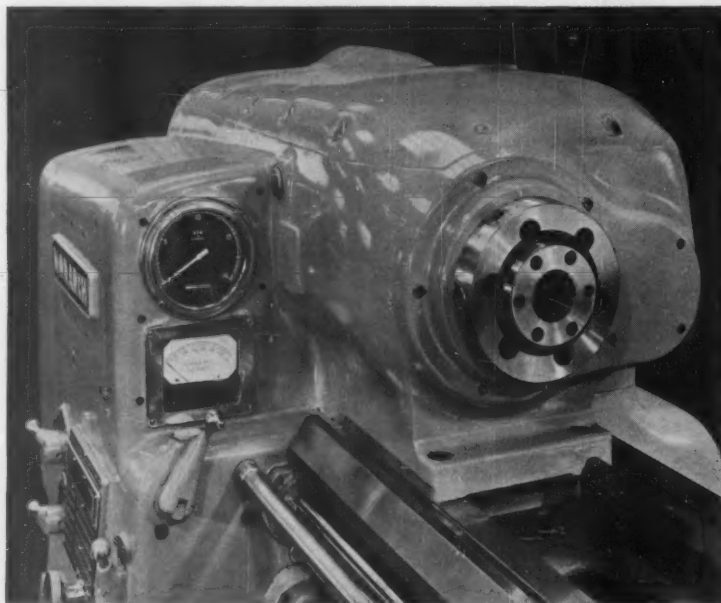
Headstock of Monarch lathe equipped with large tachometer and surface-feet-per-minute indicator
